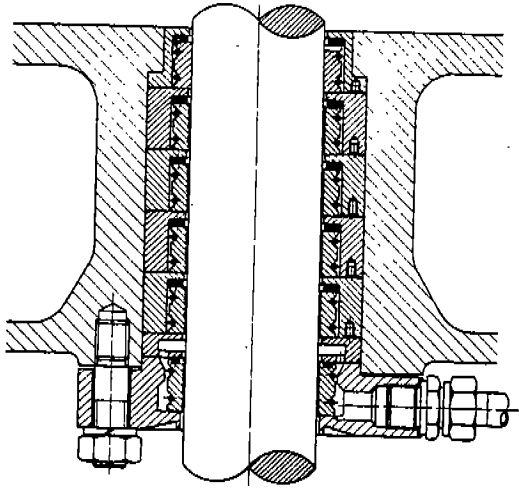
Internal Labyrinth Sealing between double acting Cylinder and Distancepiece of Crankcase (Piston rod sealing).
